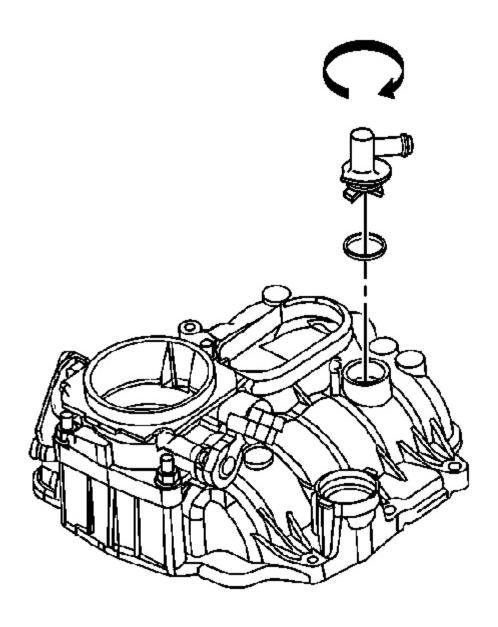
Power Brake Booster Vacuum Fitting Courtesy of GENERAL MOTORS CORP.
